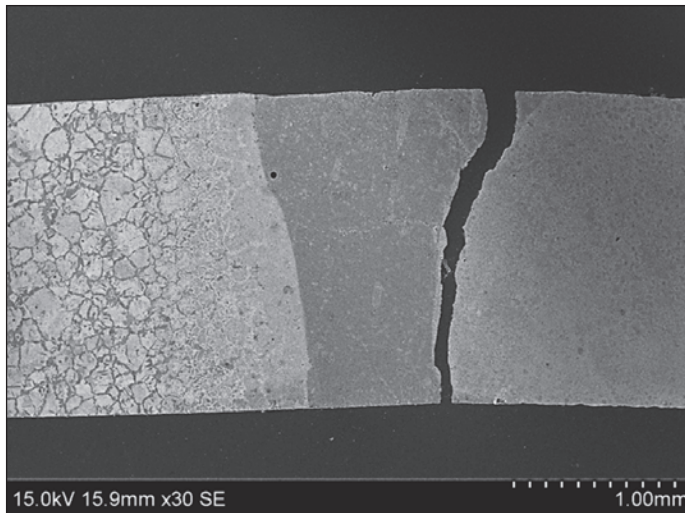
A typical face-bend tested specimen showing the fracture propagation path to follow initially the weld toe of the weld fusion zone and then in the HAZ.
